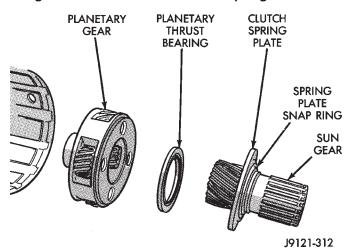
Removing Sun Gear, Thrust Bearing And Planetary Gear
